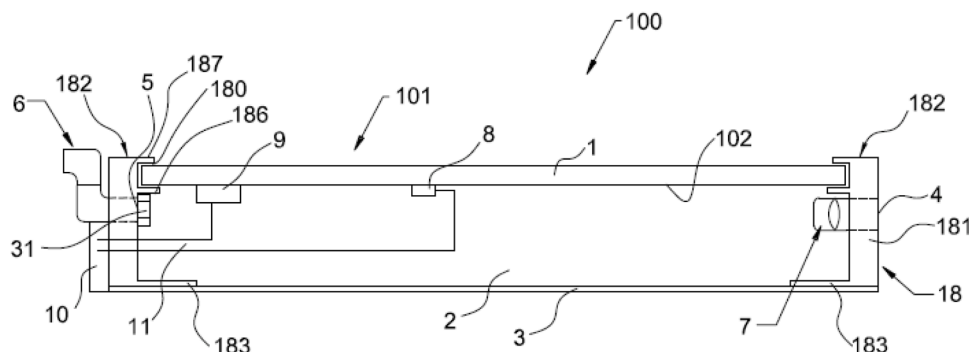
Cross-section of an embodiment of the cooling system consisting of a modified PV module.
